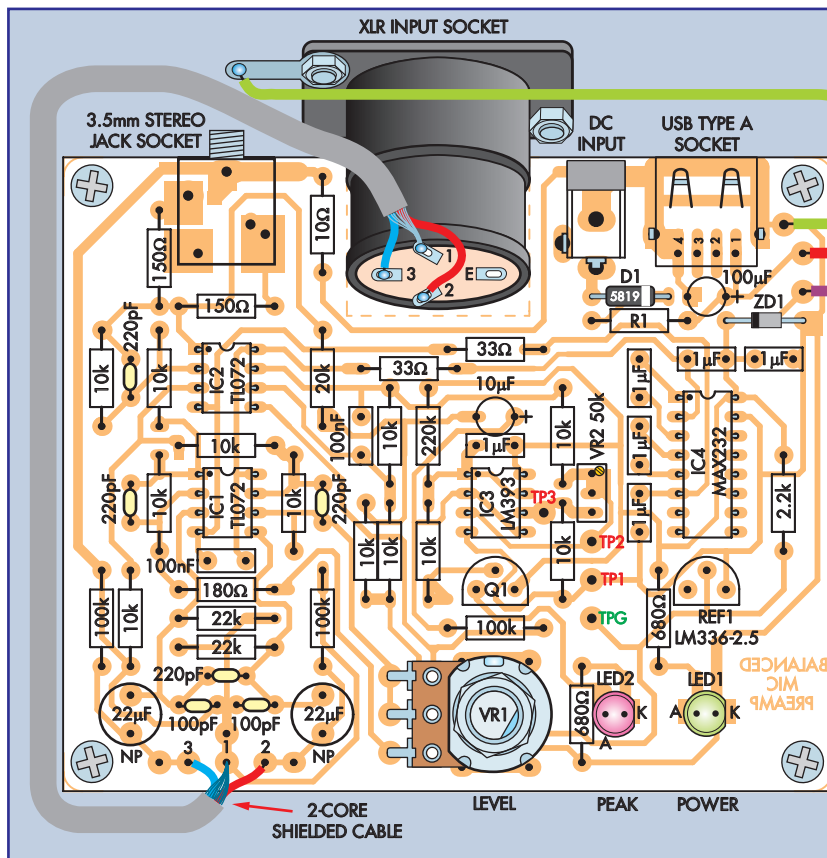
install the parts on the PC board and complete the wiring as shown in this assembly diagram. The rotary pot (VR1) is secured by soldering its body to four PC stakes, then soldering its terminals to another three PC stakes (see photos).
